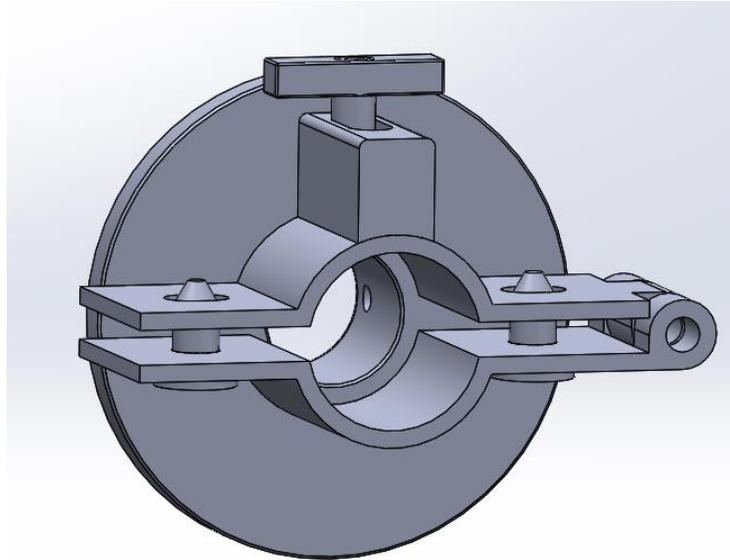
A-Stand Clamping Shaft Closed (Front View)
